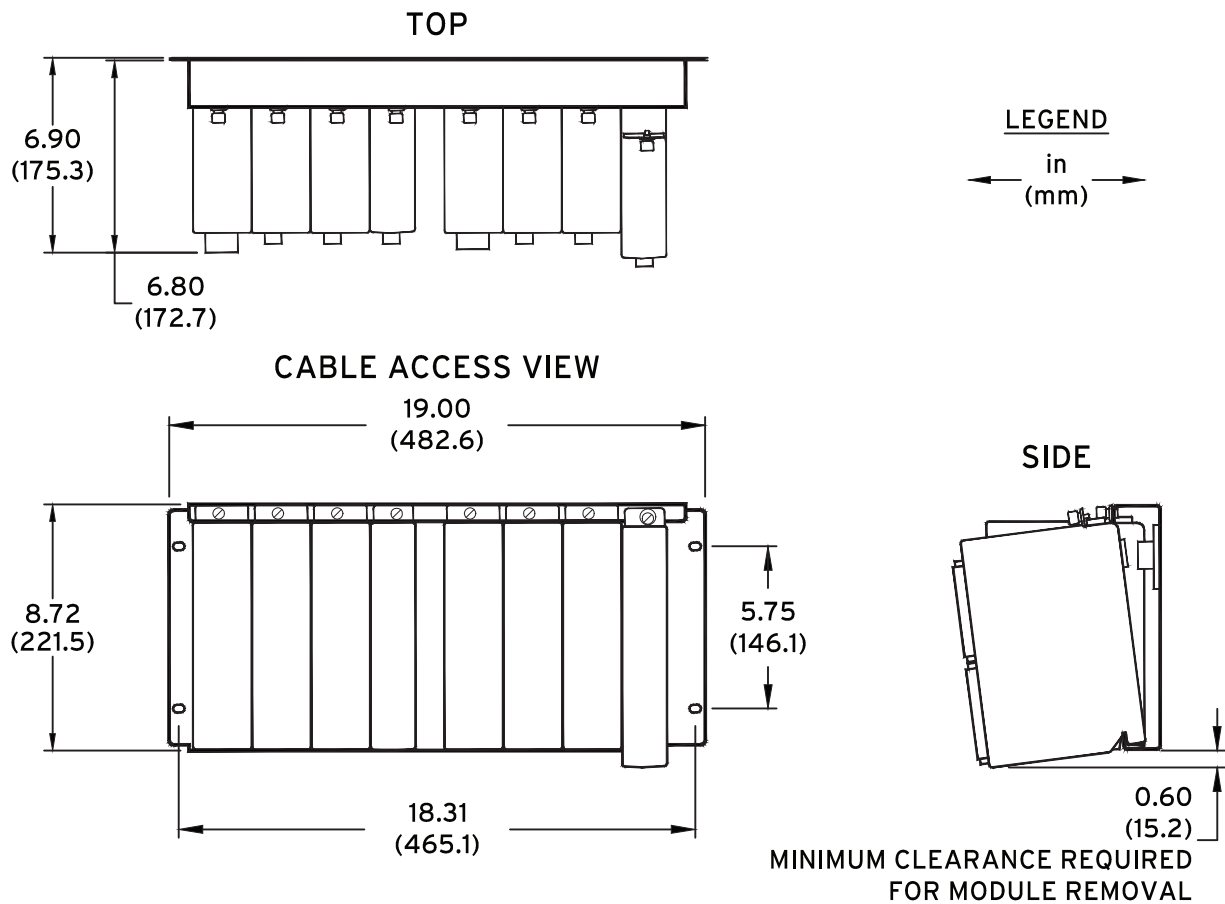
SEL-2240 Dual 4-Slot Rack- and Surface-Mount Dimensions
